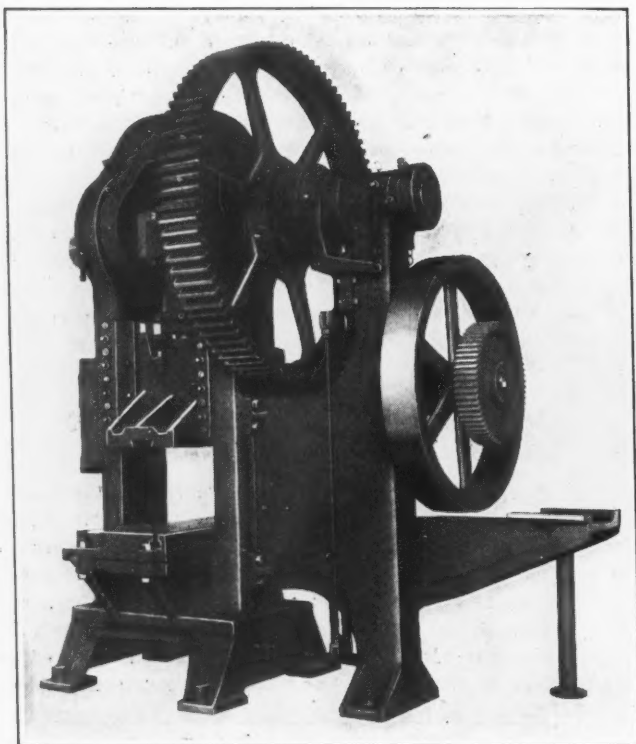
No. 6 Straight-sided Trimming Press built by Williams, White & Co.
